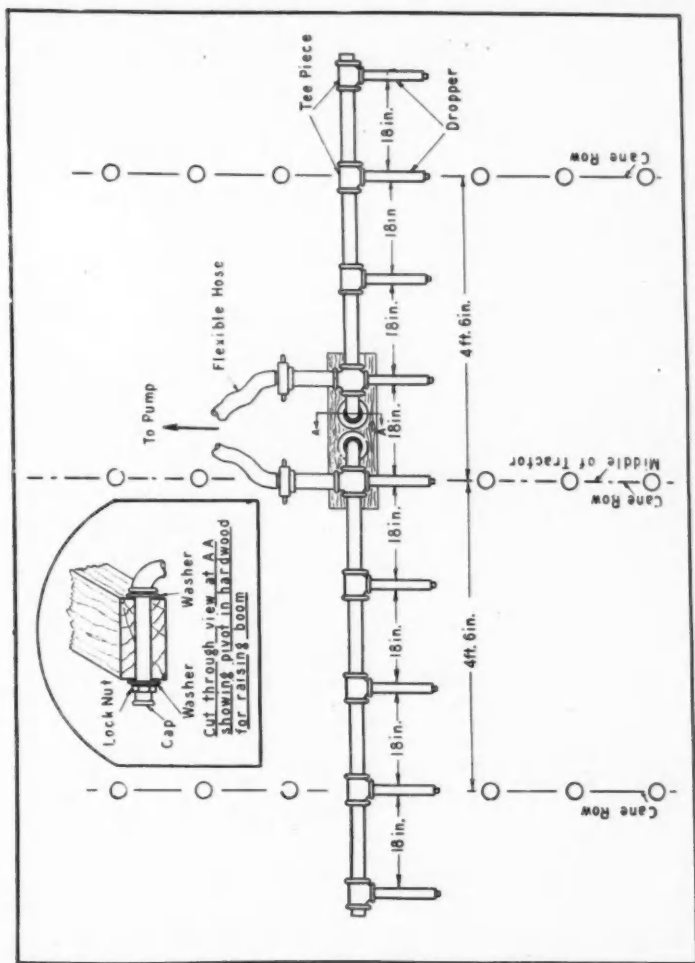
Showing the layout of a boom to cover two full interspaces and two half interspaces. INSET—Detail of pivoting assembly.
